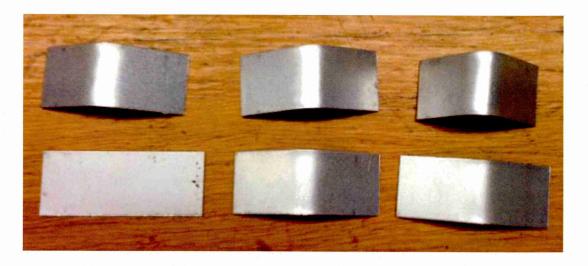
3 Point Bend Samples Post Testing With 1 Sample Pre Testing (bottom left)
